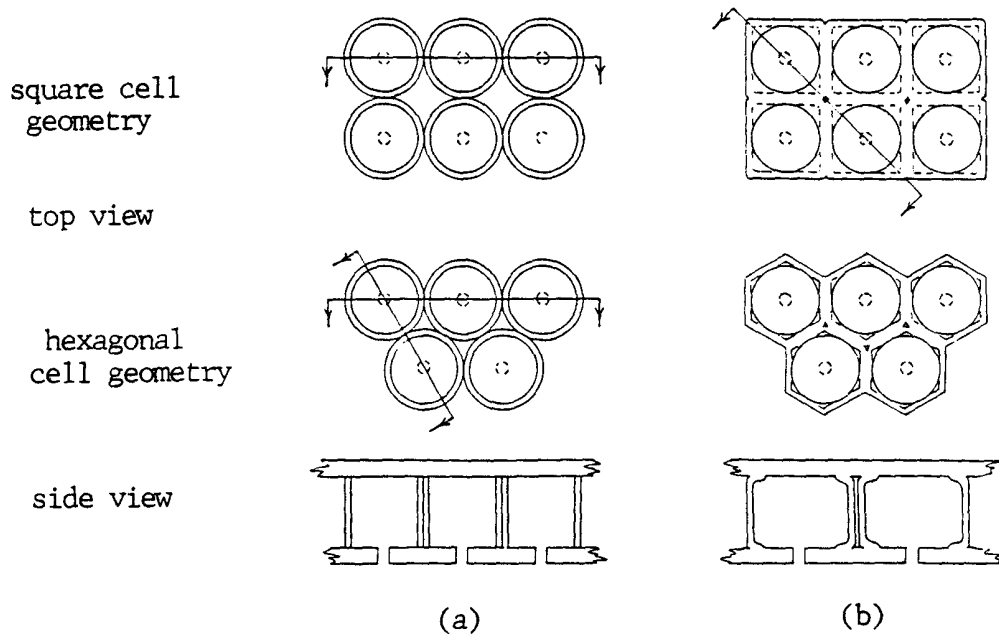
Lightweight, sandwich structure mirror blank geometry showing facesheets separated by circular tubing. a) Tubing geometry prior to fusion. b) Blank geometry following fusion and pneumatic expansion of tubing.
